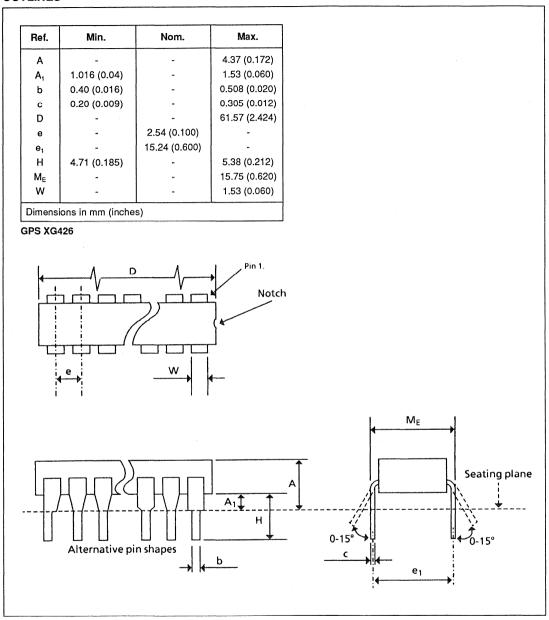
48-Lead Ceramic DIL (solder seal) - Package Style C
